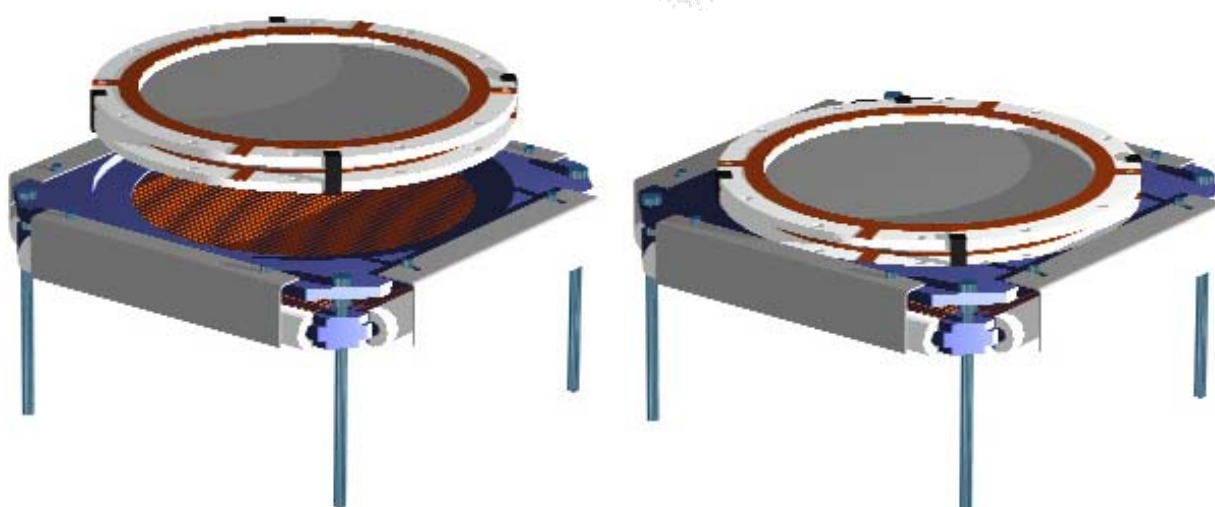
Assembly of MCP-stack - Stage 4 (DLD40 & DLD80)
